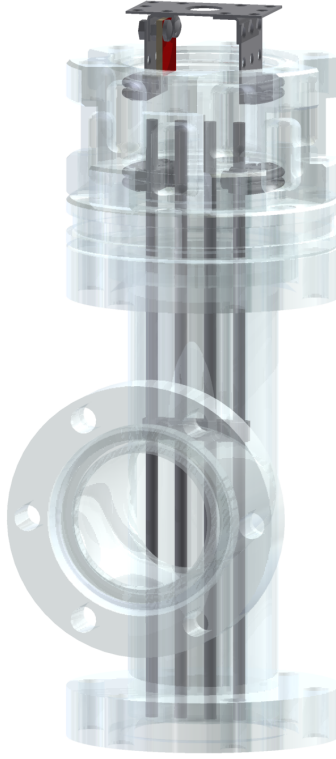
Translucent view of the chamber section just below the cavity chamber. “The wall” formed by 6-in long stainless steel rods held in place by groove grabbers holding on to the close coupler part. Pictured also is the magnetometer board (in red) attached to the structure that serves as a base for the cavity.
